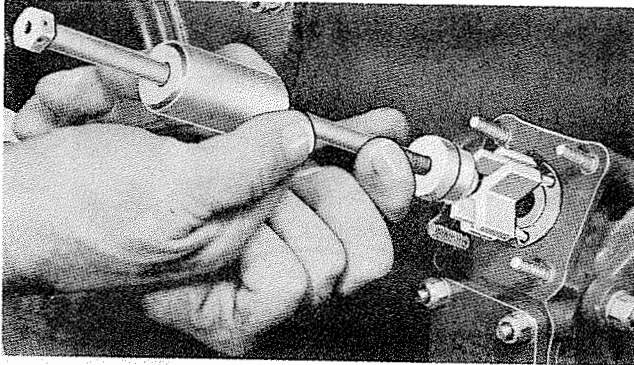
Removing Tachometer Drive Shaft Oil Seal and Retainer
